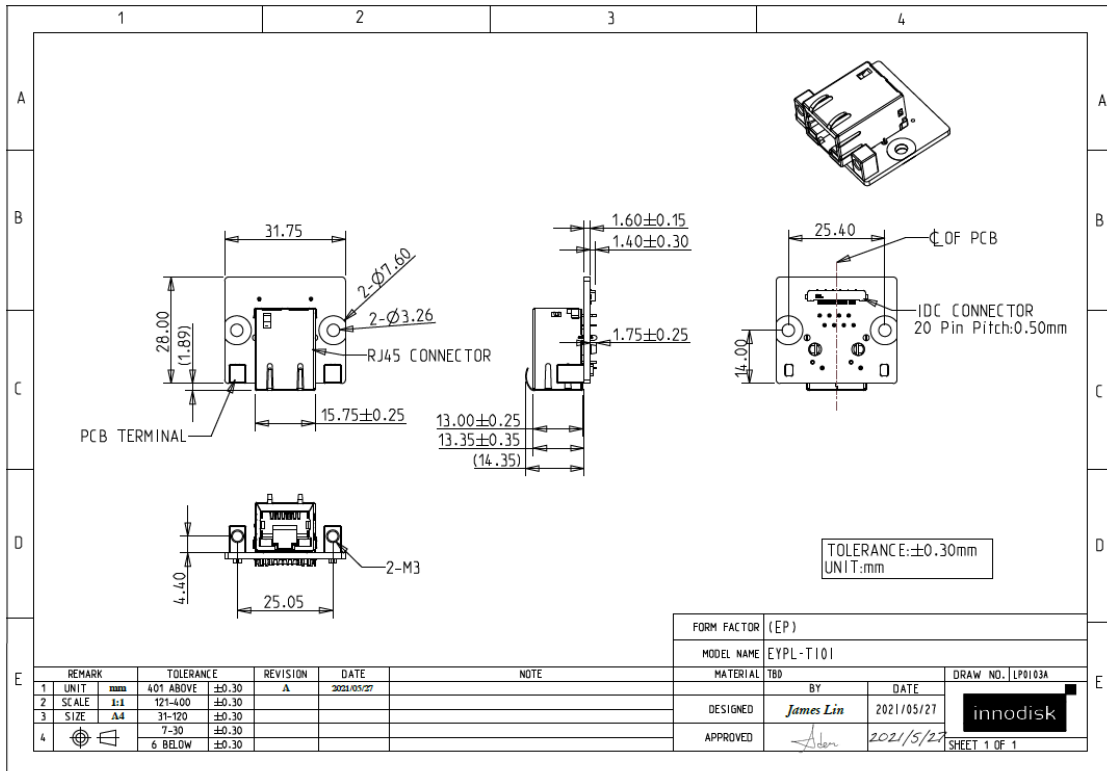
EGPL-T101 RJ45 Daughter Board Drawing
